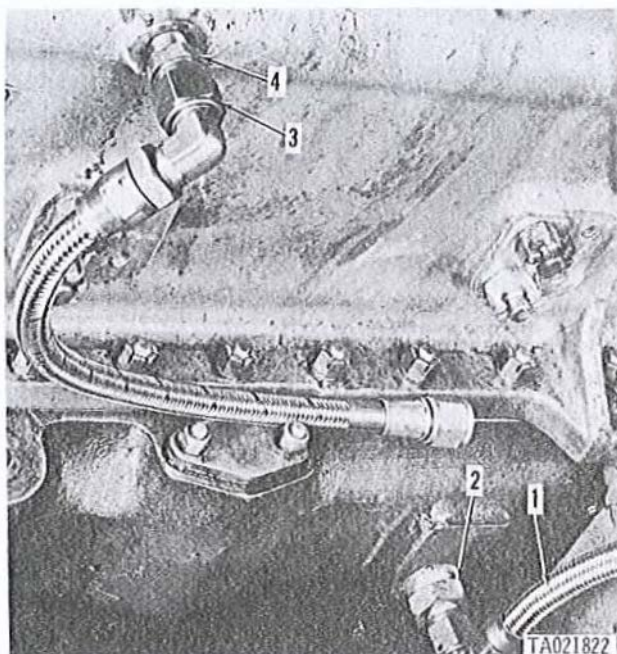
Location of preformed packing at oil transfer tubes in crankcase assembly — rear fan and accessory drive housing mounting base.
